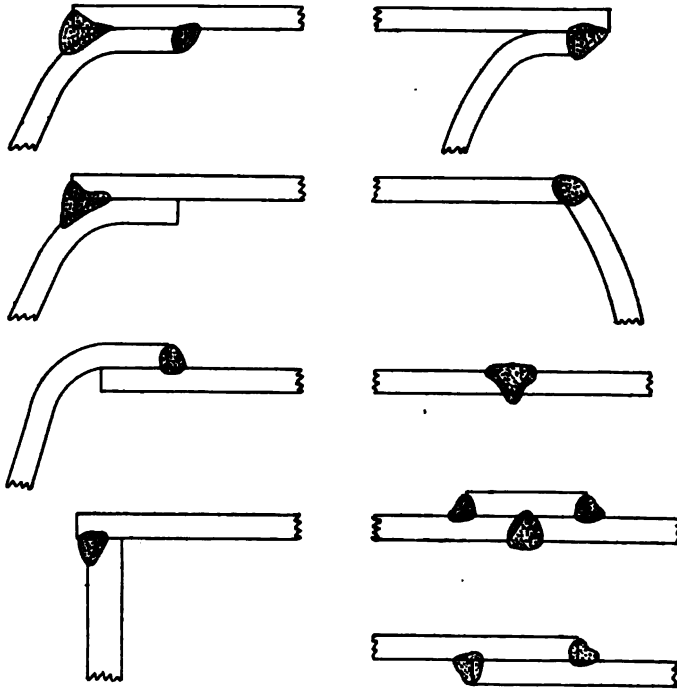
Methods of Making Welded Seams in Tanks
